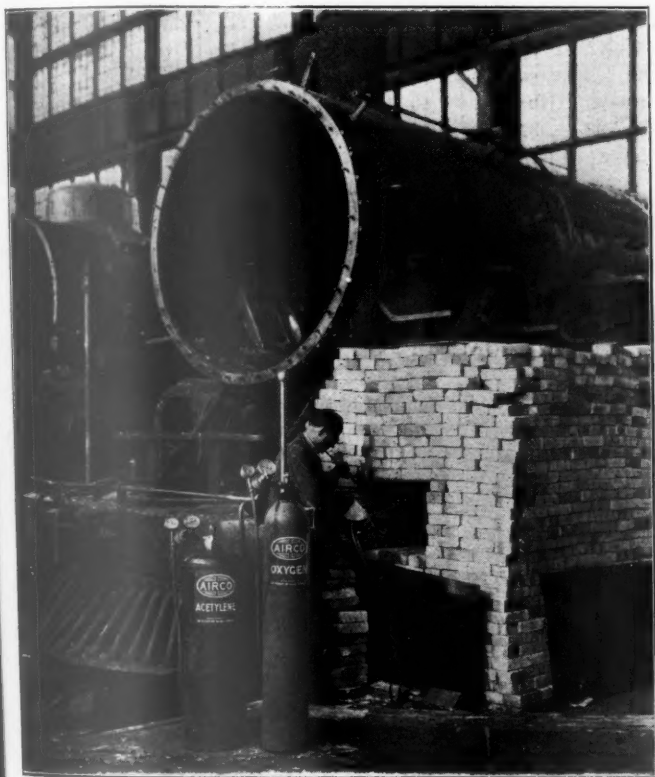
Broken Locomotive Cylinder Bricked Up for Welding
